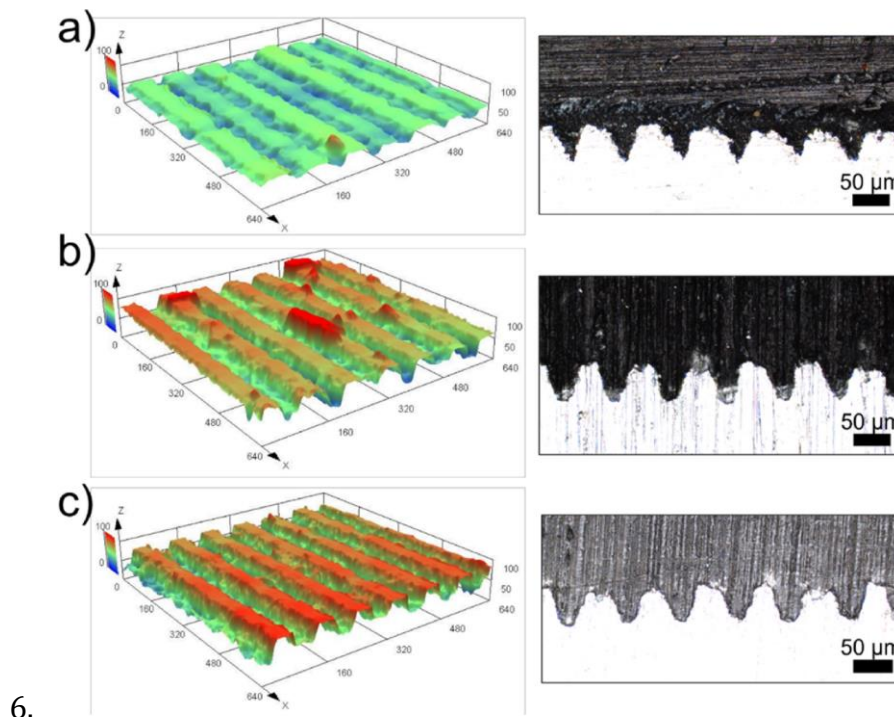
On the left, laser confocal microscopy images of polymer fracture surfaces and the right-hand side images obtained in the laser confocal microscope of the cross-section of PC/AA6061 joints injection overmolded under the following conditions: a) C1 (minimum levels); b) (center point - CP); and c) (maximum levels). In the cross-section images, metal and polymer parts appear as light and dark, respectively.
